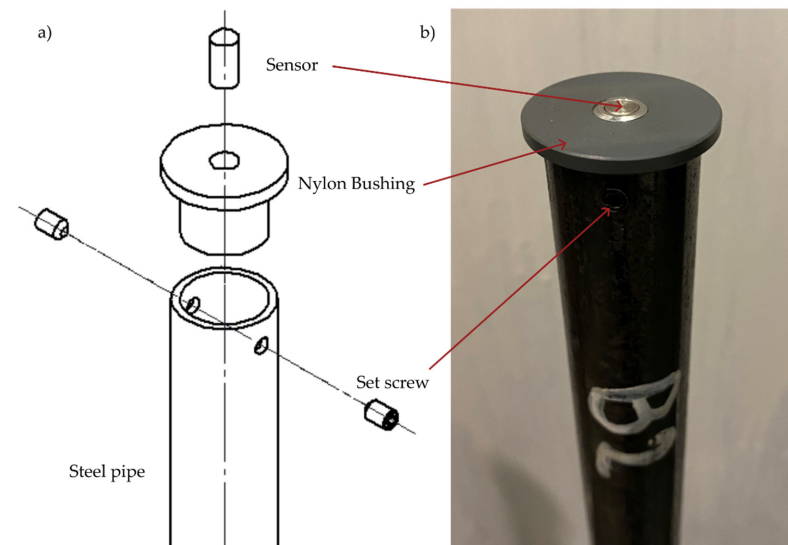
(a) Exploded view (schematic) and (b) photograph of the experimental pressure instrumentation set-up.
